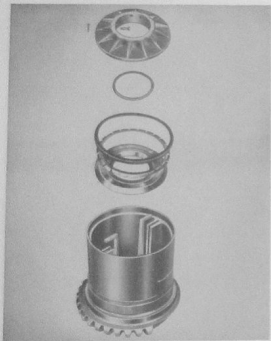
Installing Top End Plate Seals and Cover Nut—Composite View
